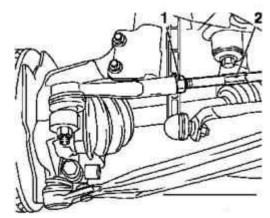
Adjusting the convergence of the front wheels: 1 - nuts, 2 - draft
